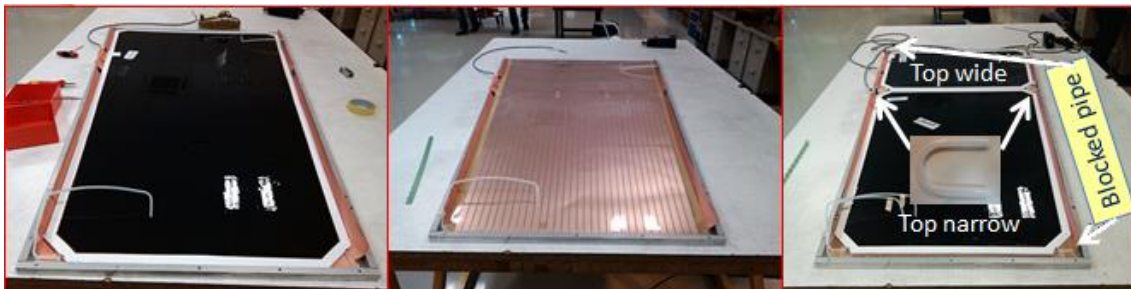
Chamber assembly – putting bottom gap and gas pipes (left), placing readout strips (middle) and top gaps with gas pipes (right).
